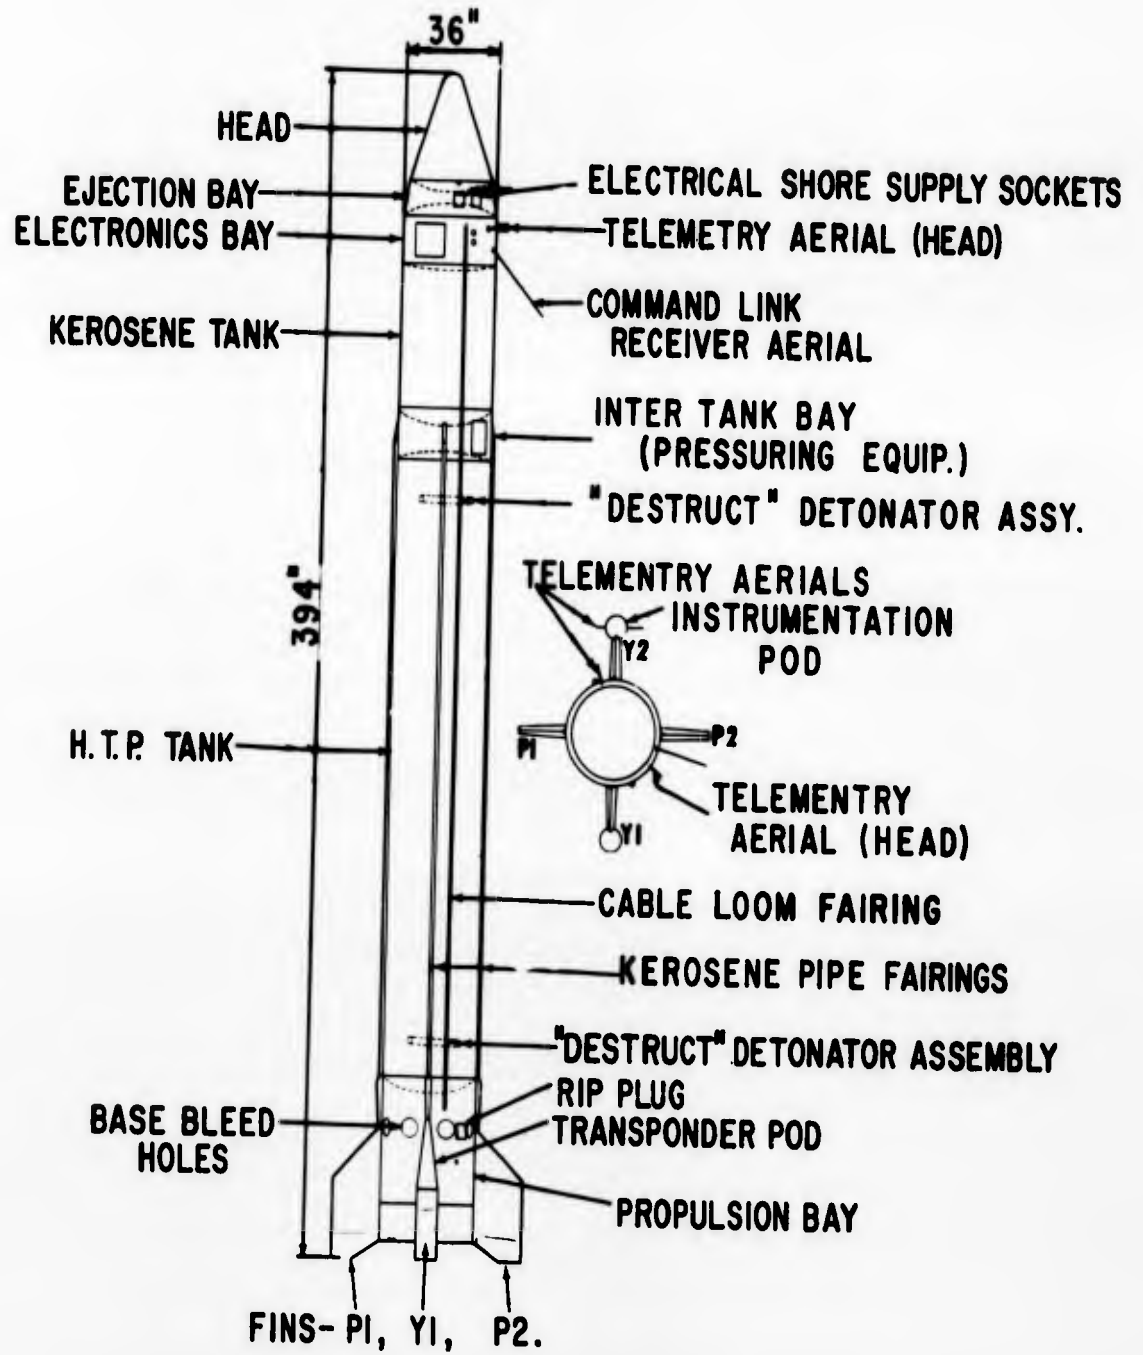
SCHEMATIC DRAWING OF SINGLE STAGE BLACK KNIGHT MISSILE
